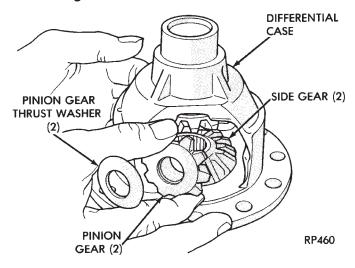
Remove or Install Pinion Gears, Side Gears, and Thrust Washers by Rotating Side Gears to Opening in Case
